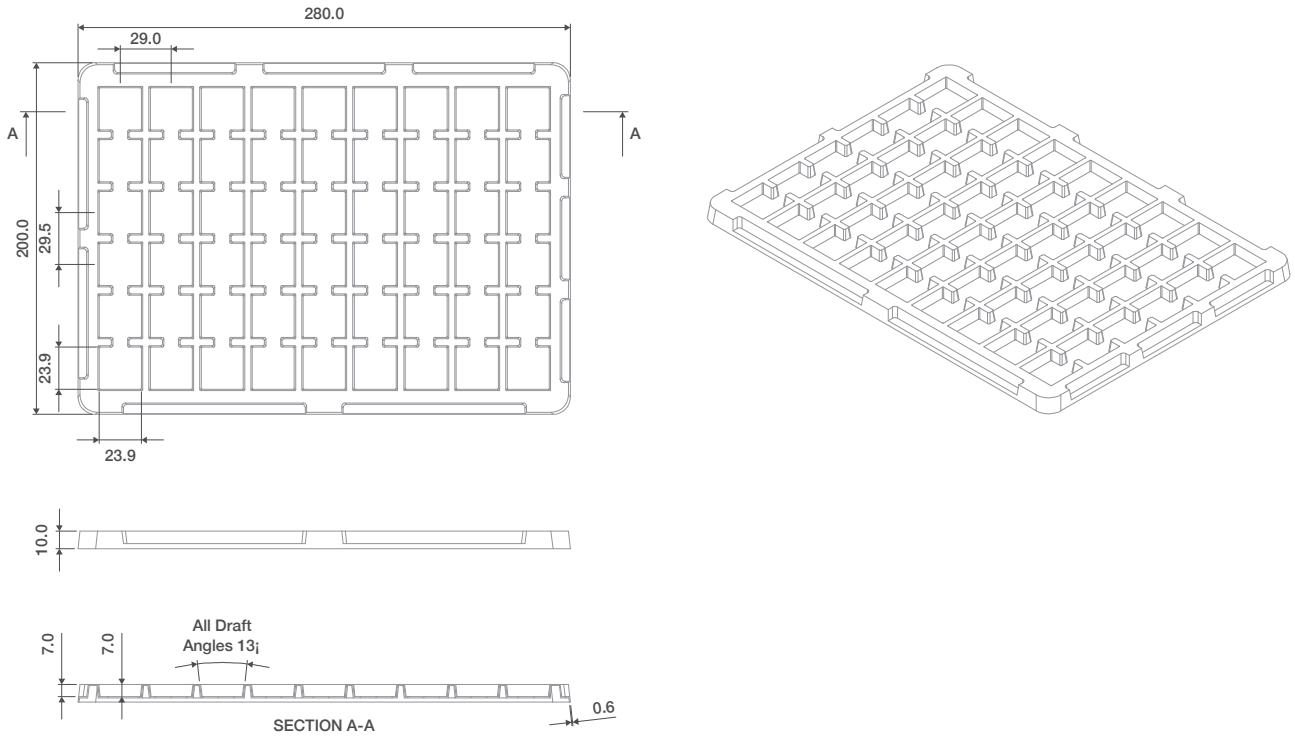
STANDARD PACKING BOX DIMENSIONS
